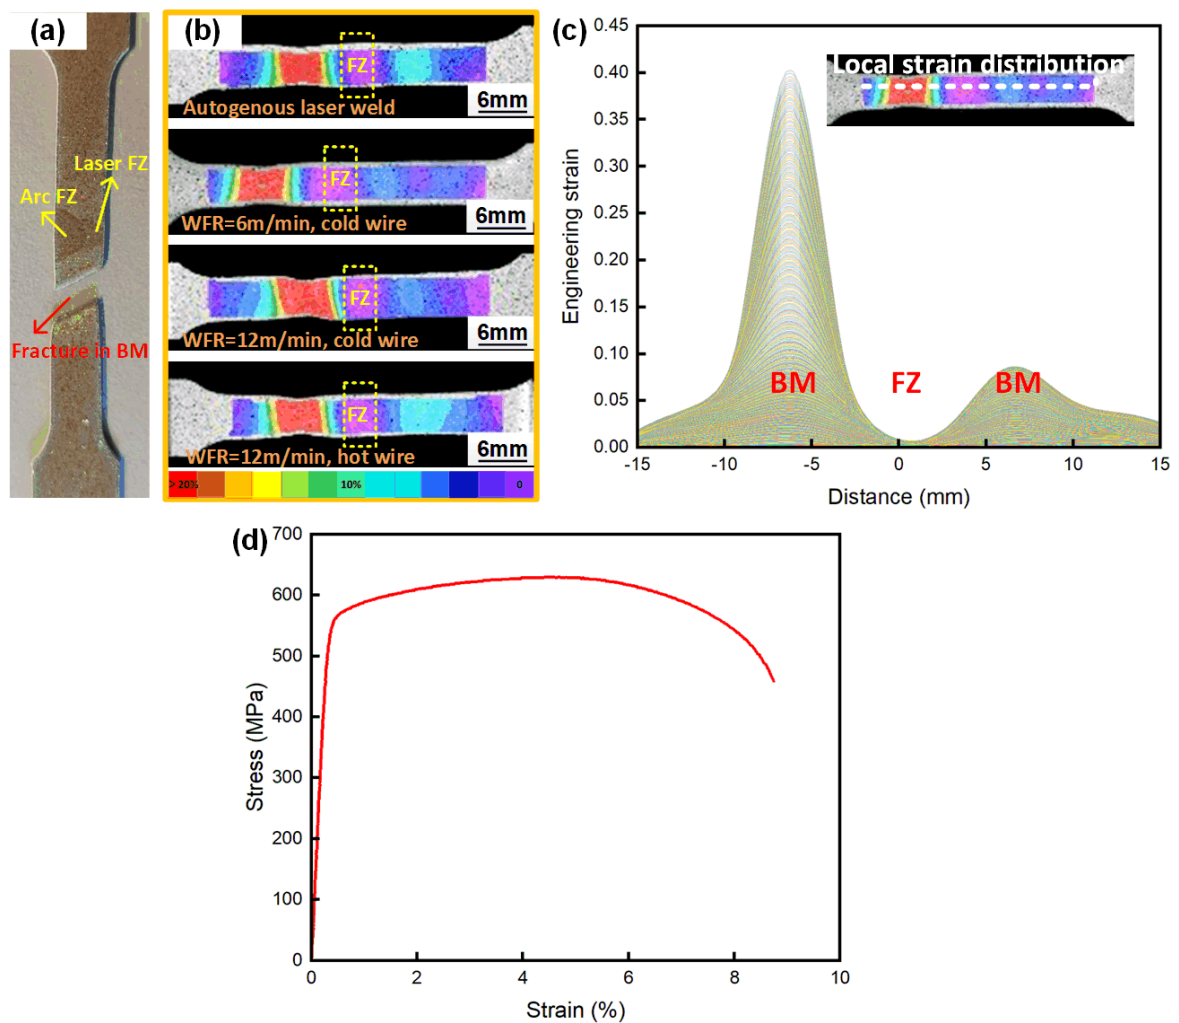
(a) Tensile coupon of cold-wire laser weld with a WFR of 6 m/min, showing the fracture in the base metal; (b) DIC strain maps with different welding parameters; (c) local strain distribution of cold-wire laser weld with a WFR of 6 m/min; (d) stress-strain curve of cold-wire laser weld with a WFR of 6 m/min.
